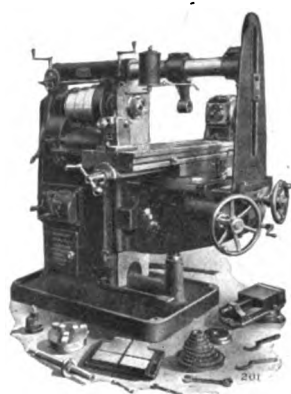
No. B3 Heavy and No. B4 Plain "Ohio" Milling Machine
